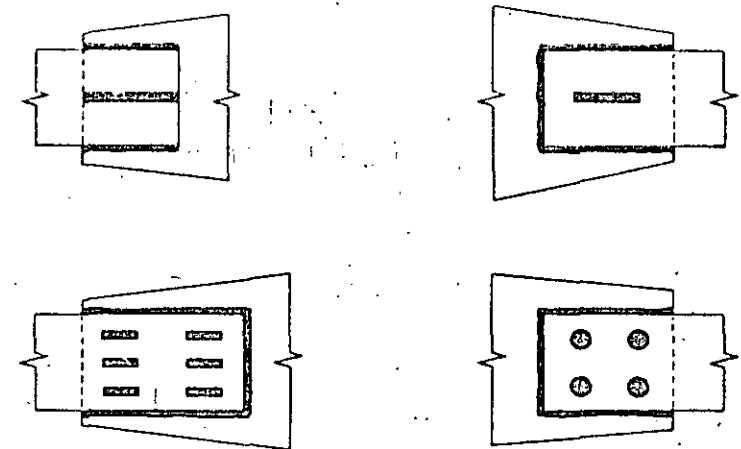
Slot and plug welds in combination with fillet welds.
